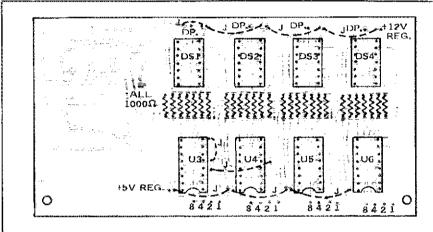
Parts placement guide for the display circuit board, not shown at actual size. These views show the component side of the board. Parts on the area of the board at the left will be assembled at a later time.
